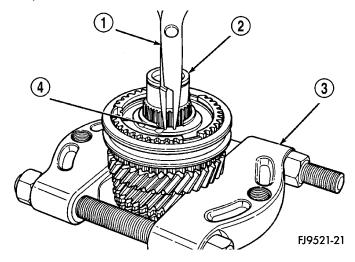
5th Gear Synchronizer Snap Ring Installation
